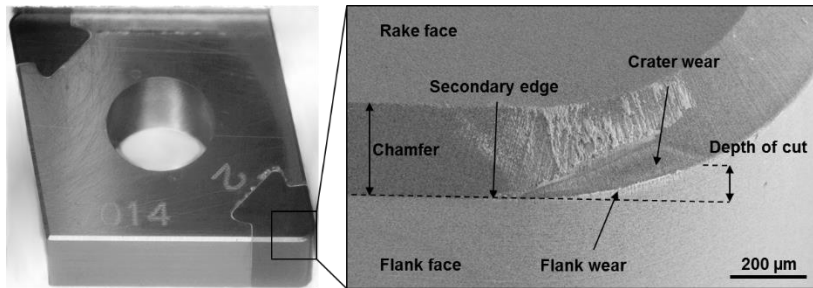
Overview of the a) PCBN cutting tool used in paper IV,V and b) typical tool wear patterns¹⁰.
